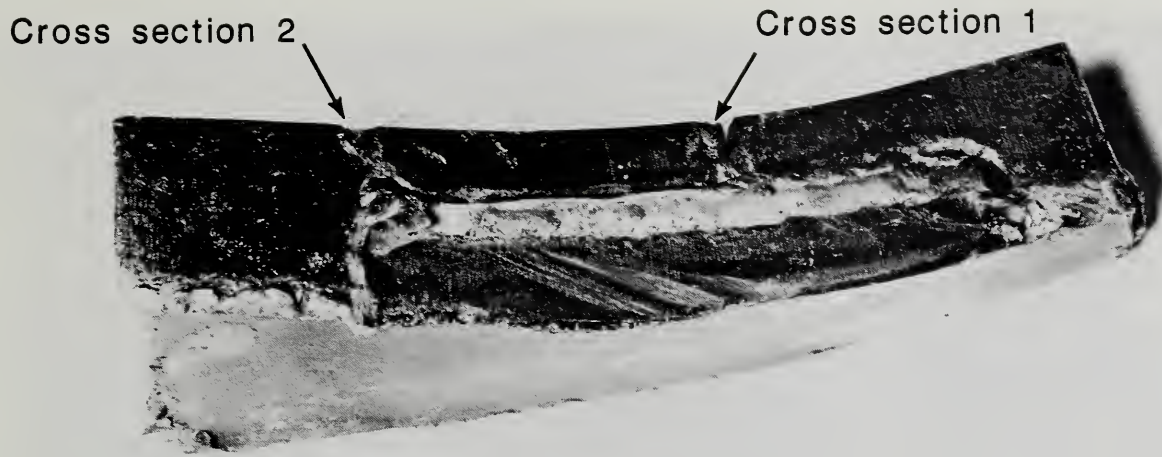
Cross section showing the weld in specimen NBS 4-W1 (x 4)
